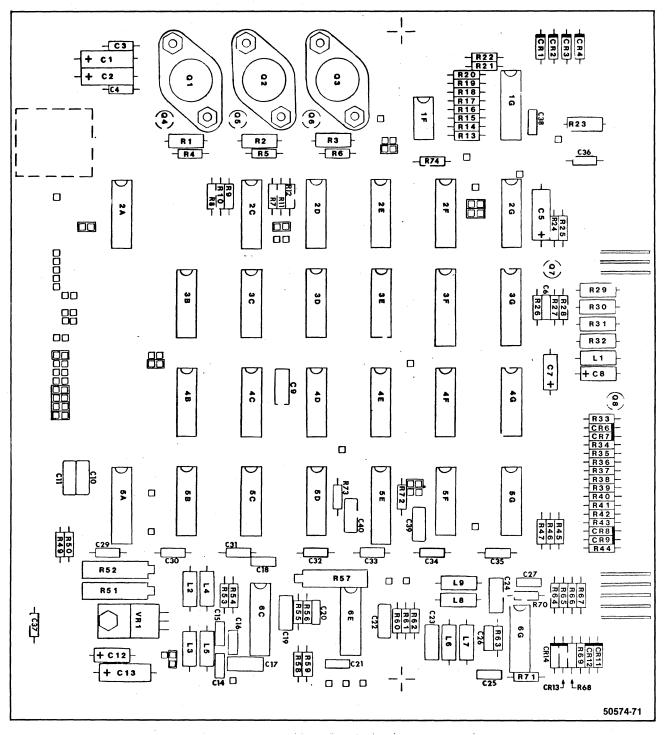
PCB COMPONENT LOCATIONS P/N 2510X
